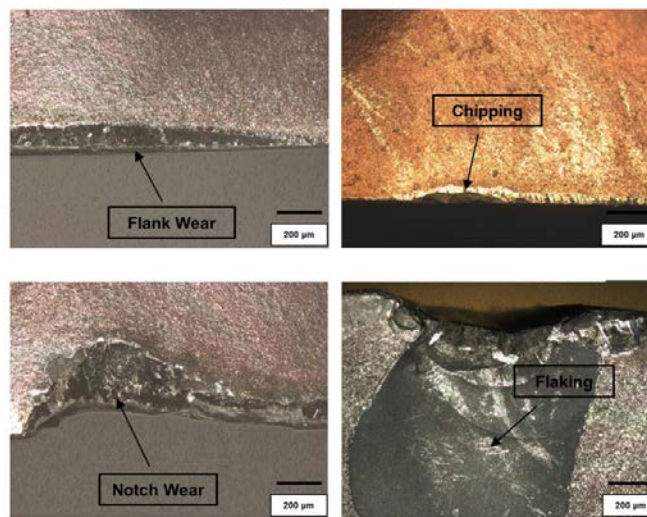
Common type of wear in milling IN718. (a) Flank wear, (b) Chipping, (c) Notch wear and (d) Flaking [29]
